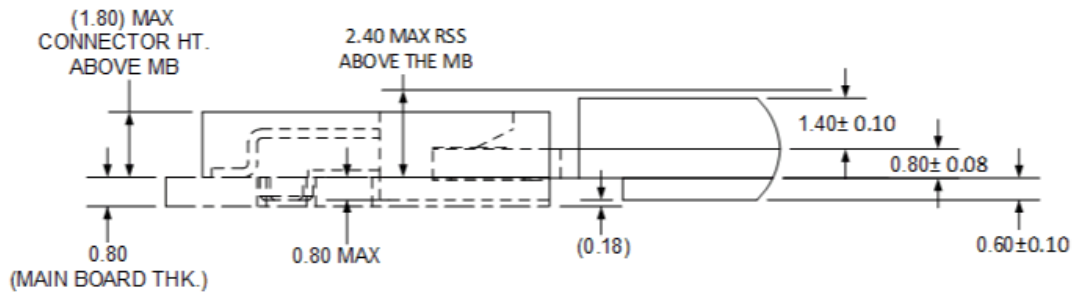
Stack-up Mid-mount (In-line) Double-sided (D4) Add-in Card Module for 1.5 Maximum Top-side Component Height
